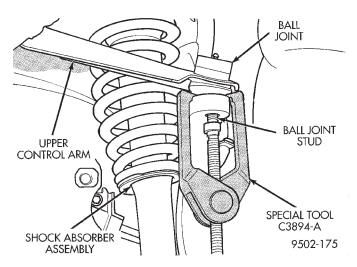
Ball Joint Stud Removal From Steering Knuckle
